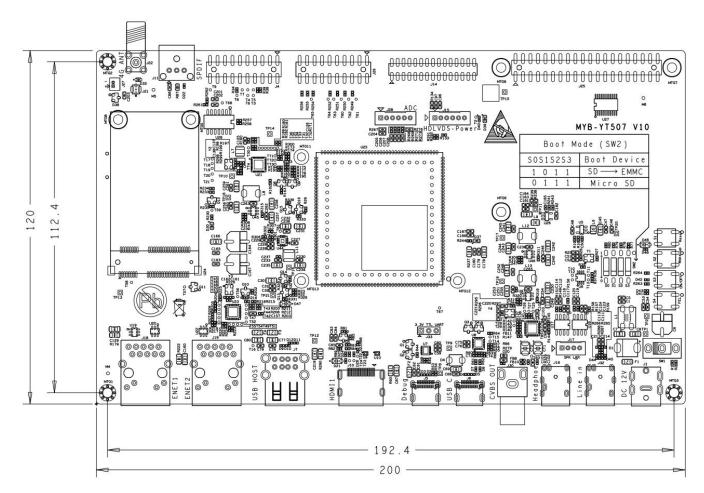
MYD-YT507H Base Board Dimensions Chart (Unit: MM)
